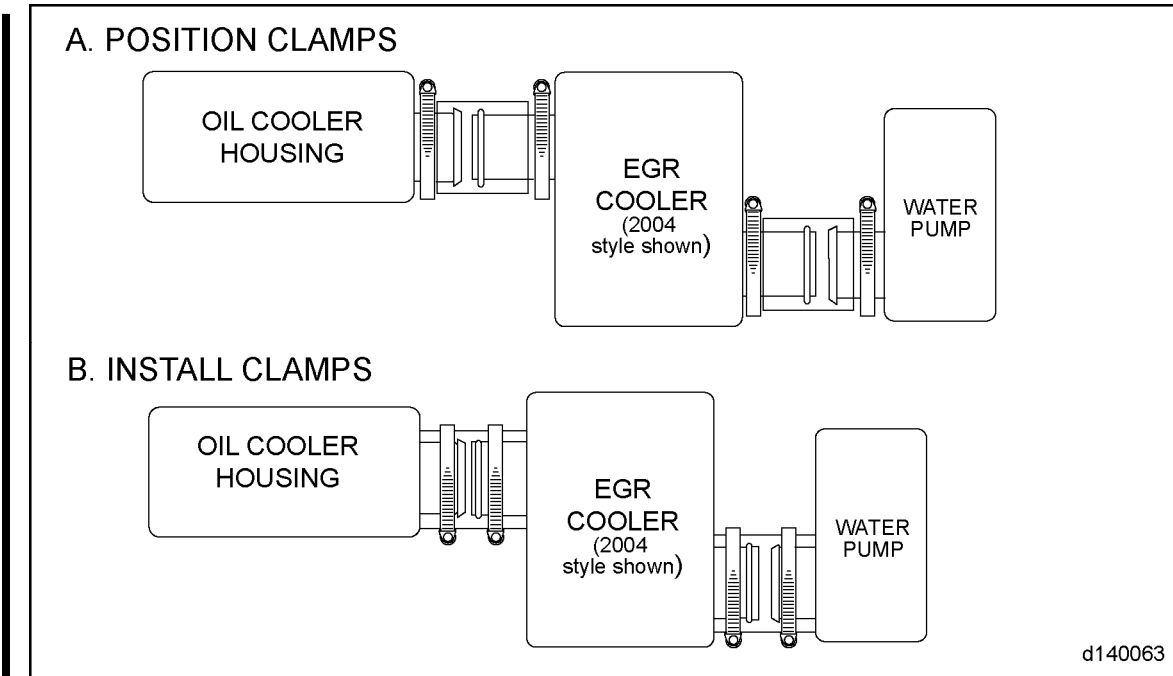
Installing Constant Tension Clamps on Multiple Connections
